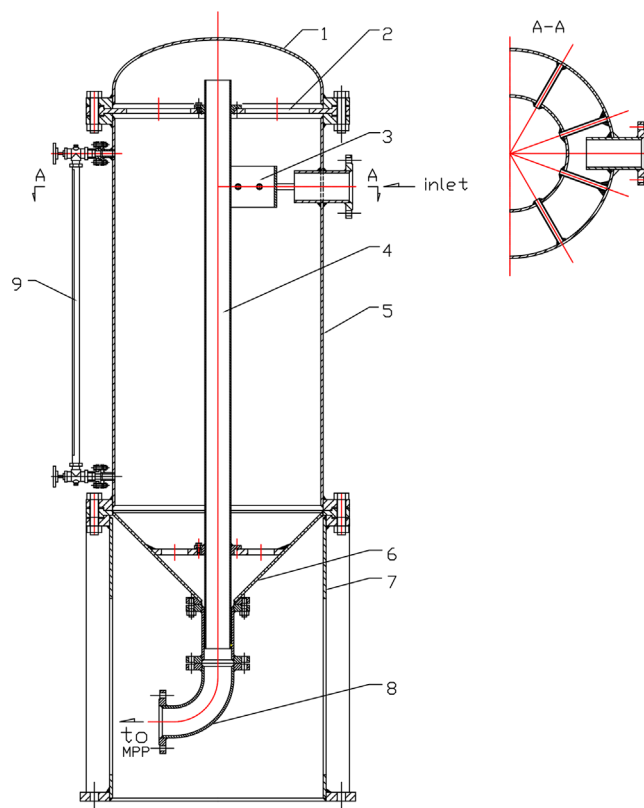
Structure of buffer tank. (1) Cover of the upper part. (2) Upper inner cover. (3) Lower inner cover. (4) Central perforated tube. (5) Barrel. (6) Cover of the lower part. (7) Base. (8) Elbow pipe. (9) Liquid-level meter.
